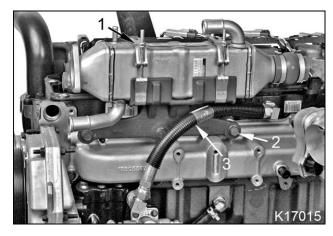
Intake side EGR cooler assembly and high-pressure oil hose
